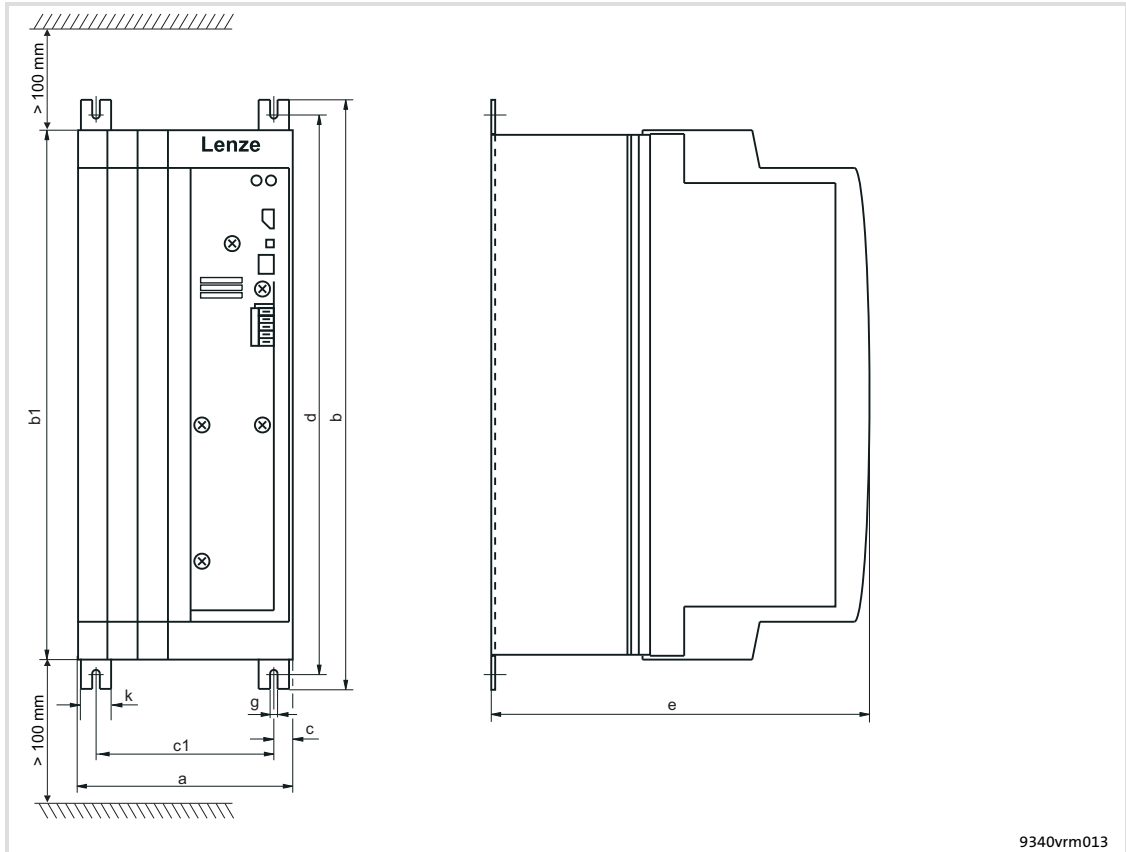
Dimensions of EMB9341-E and EMB9342-E for mounting with fixing rails
